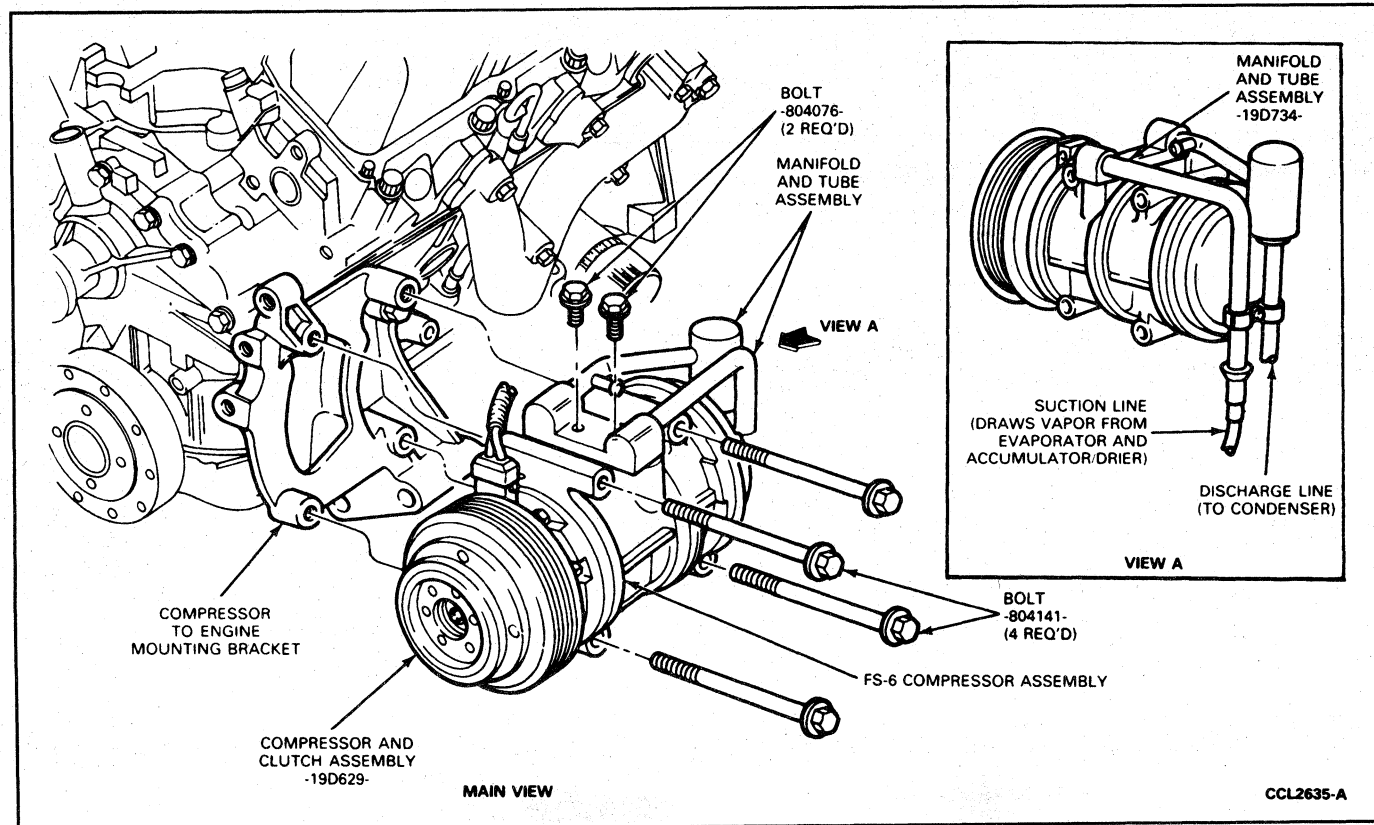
FS-6 Compressor Installation—3.0L Engine
